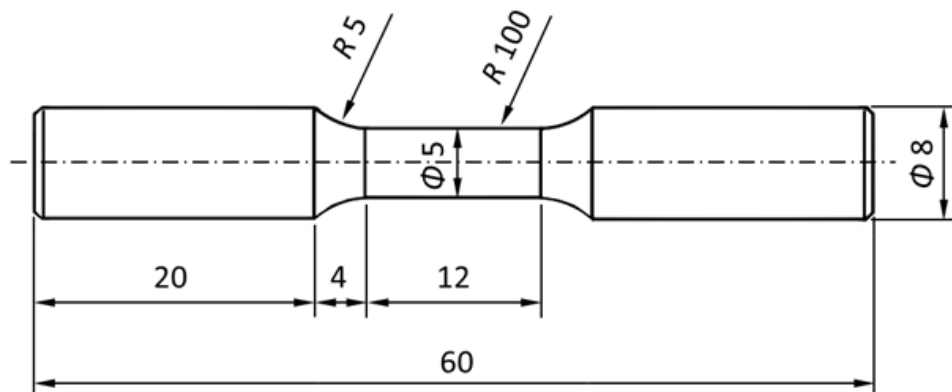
Specimen geometry used for rotary bending fatigue tests (unit: mm)
